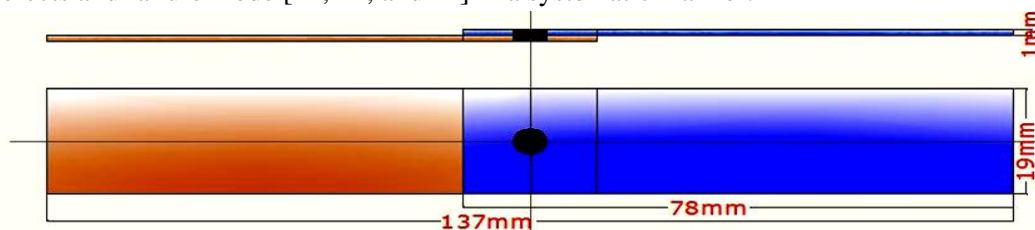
The spot welds specimen's dimensions, according to ANSI/ AWS standard
